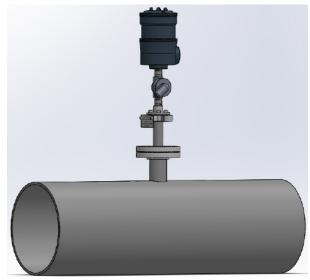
Installation into Larger Pipe Through a 2" or 3" Side Port
